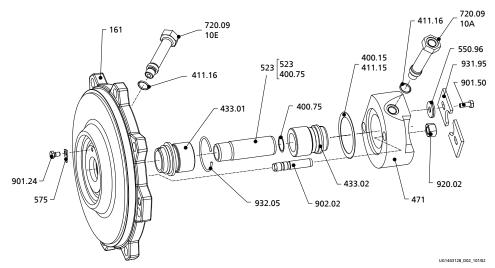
Version with double mechanical seal in back-to-back arrangement
